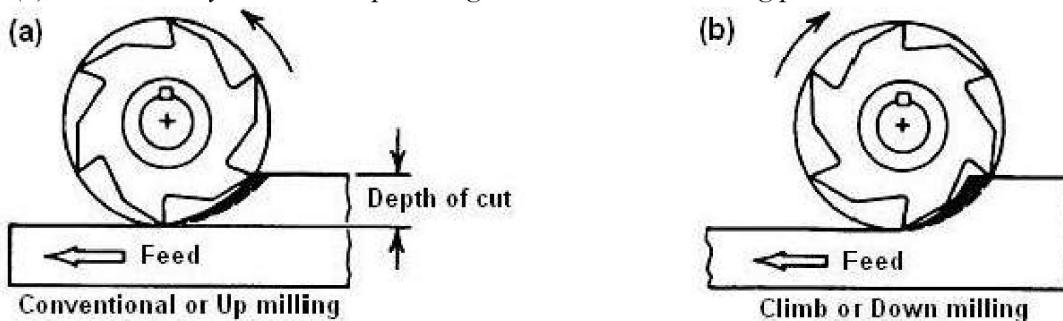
Schematic views of (a) Up milling process and (b) Down milling process
